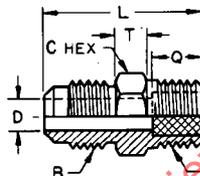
FUSIBLE CONNECTOR (HALF UNION)
